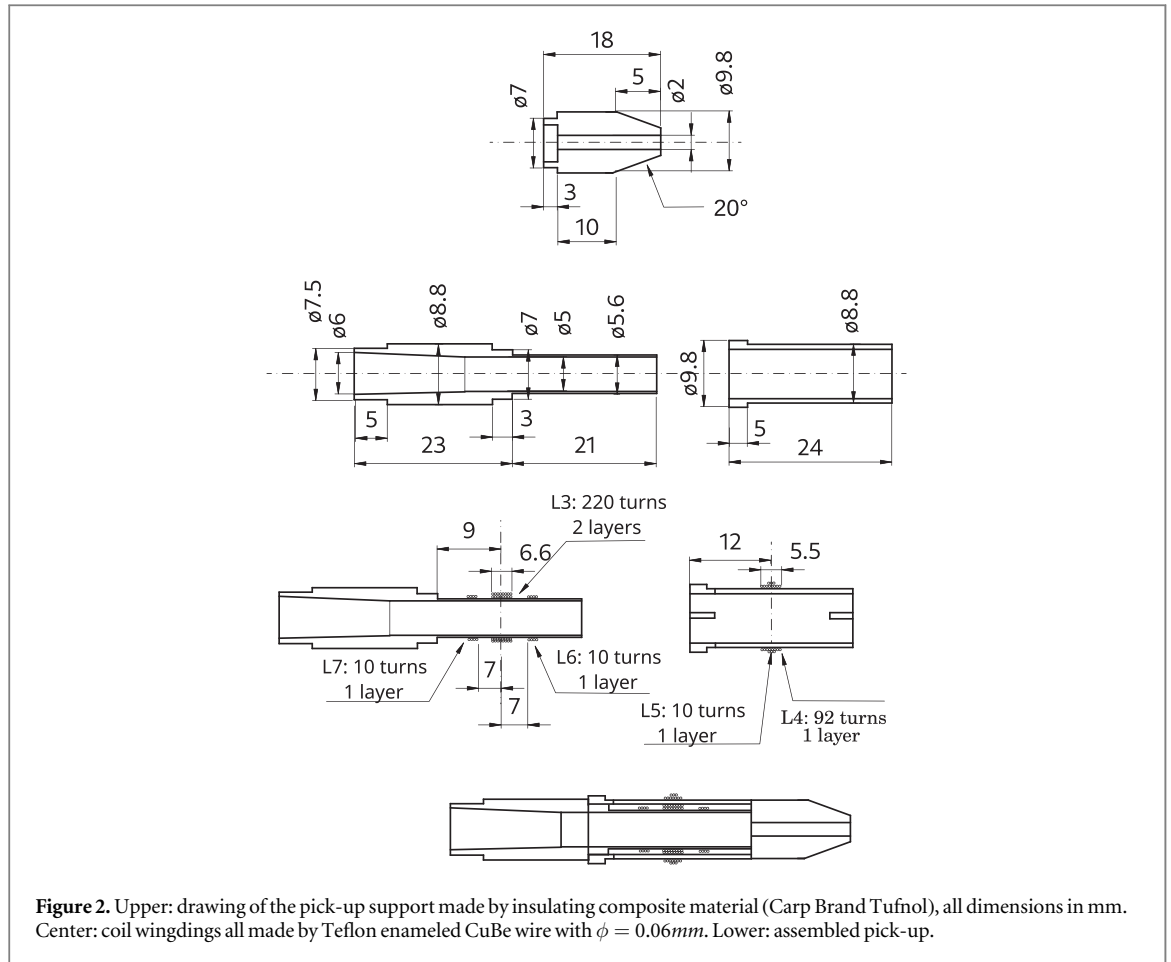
Upper: drawing of the pick-up support made by insulating composite material (Carp Brand Tufnol), all dimensions in mm. Center: coil windings all made by Teflon enameled CuBe wire with $\phi = 0.06\text{mm}$. Lower: assembled pick-up.
